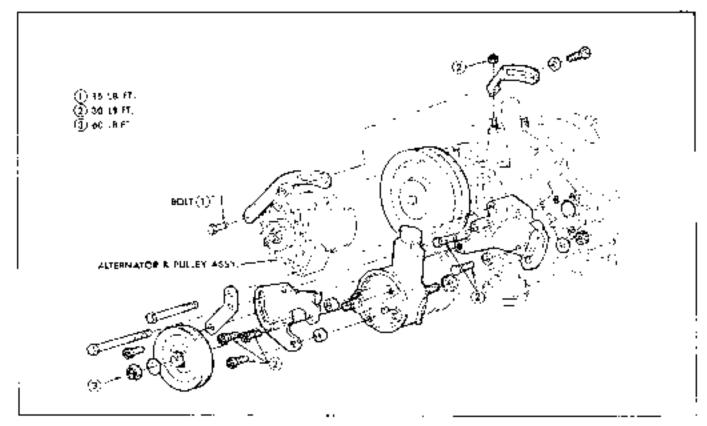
88 Installation of Hower Steering Pump for V8 Engine.
